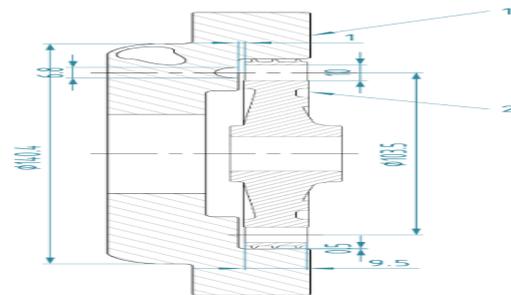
Axial stage with axisymmetric nozzles: 1 – nozzle diaphragm; 2 – impeller
